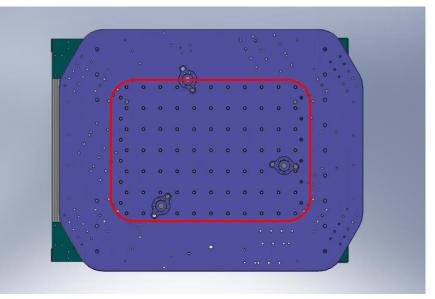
Torque top Stiffener Assembly bolts to final spec.
